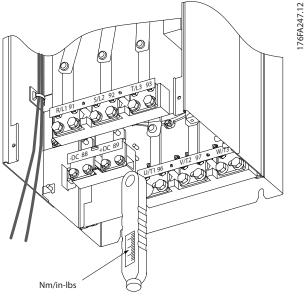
Always use a torque wrench to tighten the bolts.
